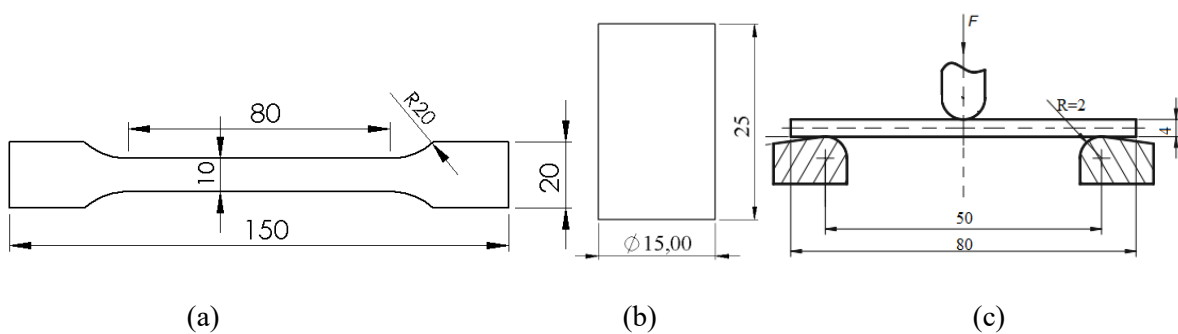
The specimen dimensions (mm) for a) tensile test, b) compressive test, c) 3 point bending test
